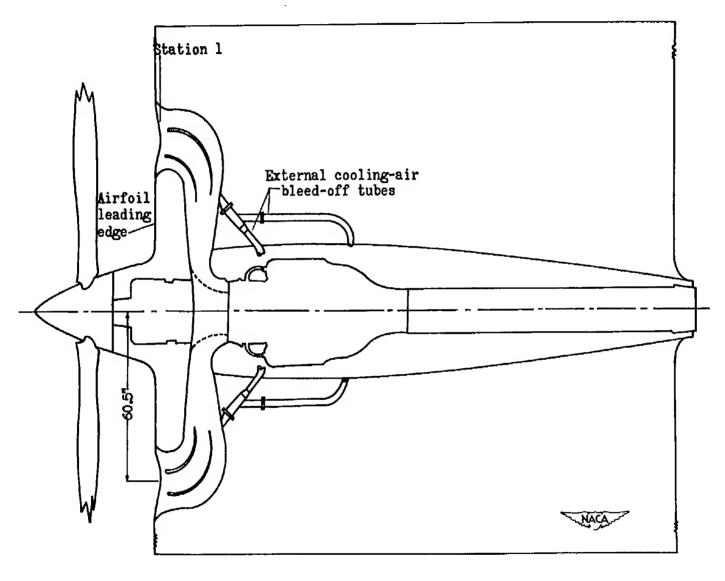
Sketch of axial-flow gas turbine-propel ler engine installation showing location of wing ducts and inlets.
